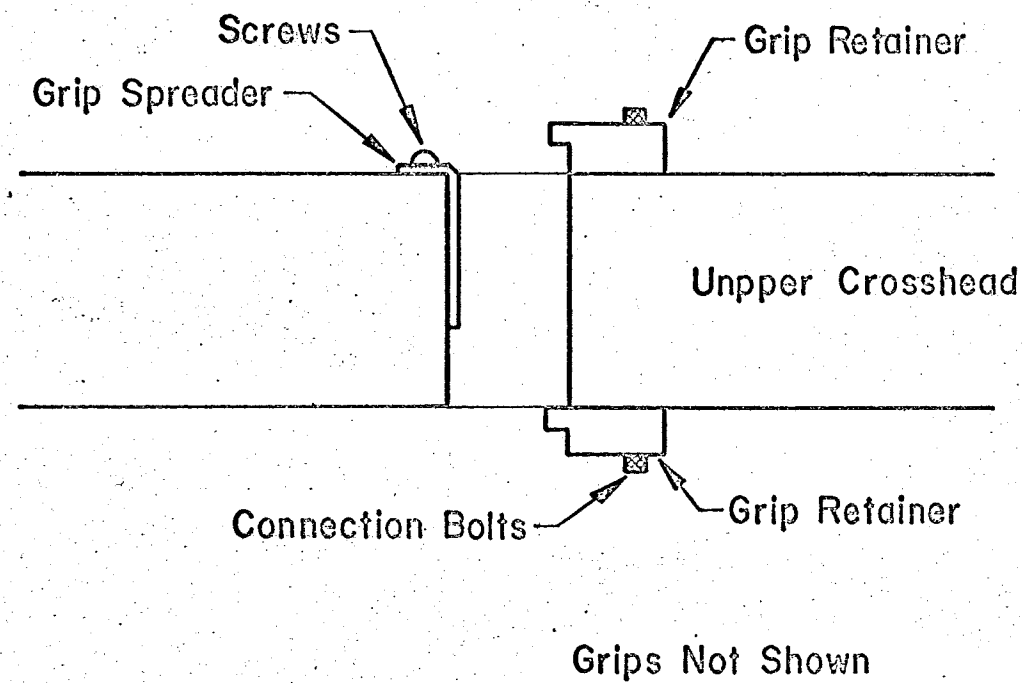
FRONT VIEW OF SECTION THRU CROSSHEADS SHOWING THE ARRANGEMENT OF GRIP SPREADERS AND GRIP RETAINERS
